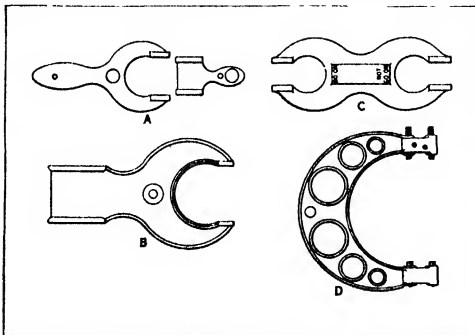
GAUGES (A) SEPARATE CALIPER. (B) COMBINED INTERNAL AND EXTERNAL. (C) DIFFERENCE. (D) NEWALL ADJUSTABLE LIMIT GAUGE
